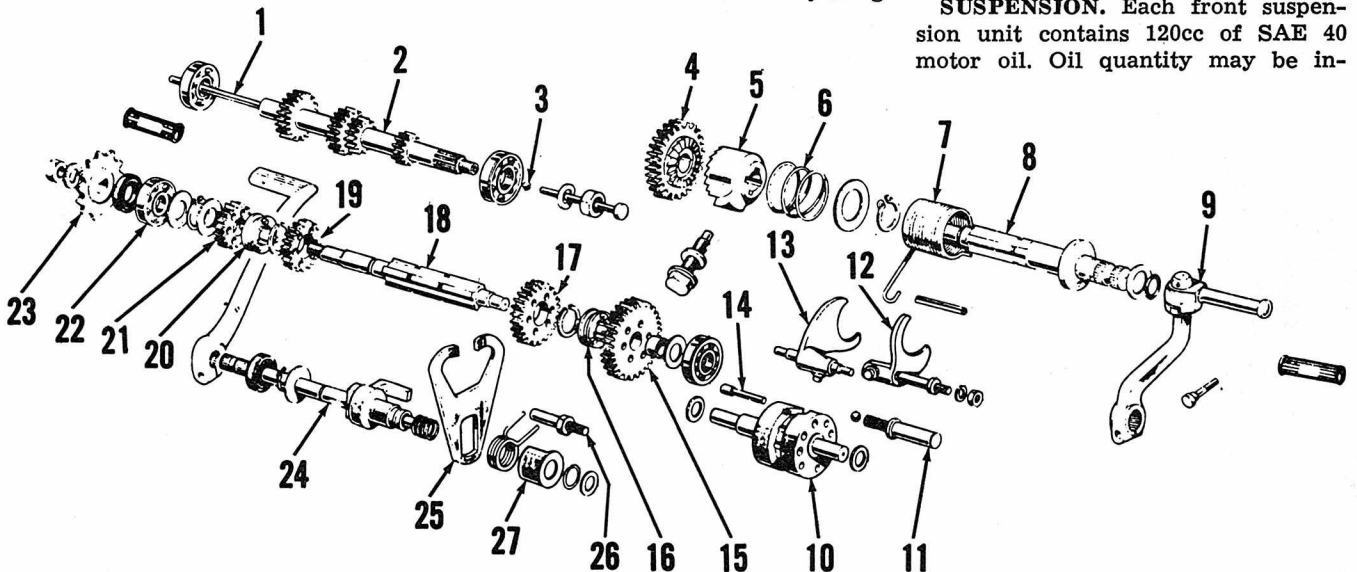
Exploded view of transmission and kickstarter assembly.
